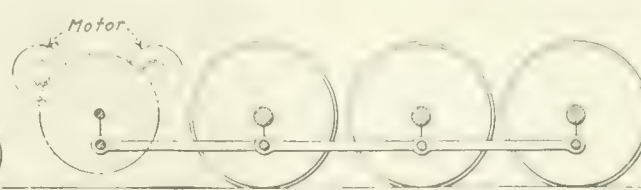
TYPE 3. ROD DRIVE WITH GEARED MOTOR
